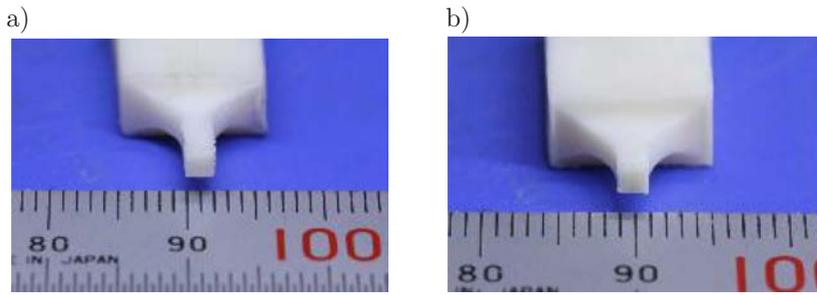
Fracture surface after dynamic tensile test: a) PLA : PBAT = 60 : 40,
